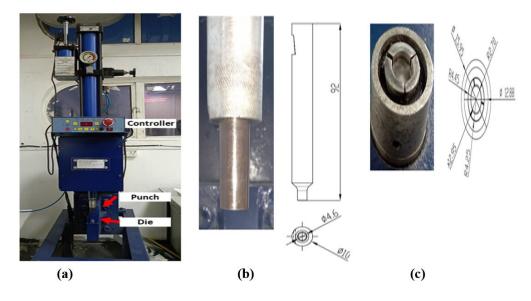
(a) Mechanical Clinching machine (b) Clinching tool (c) Extensible die.
